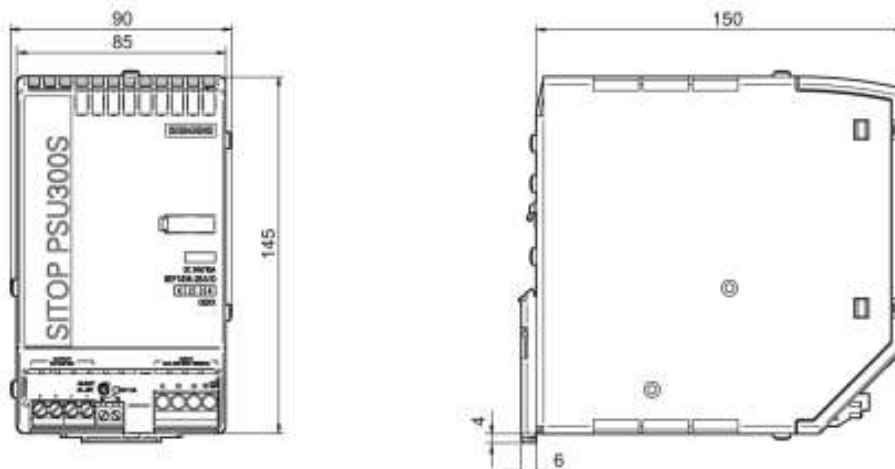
Dimension drawing 6EP1434-2BA10, 6EP1436-2BA10
